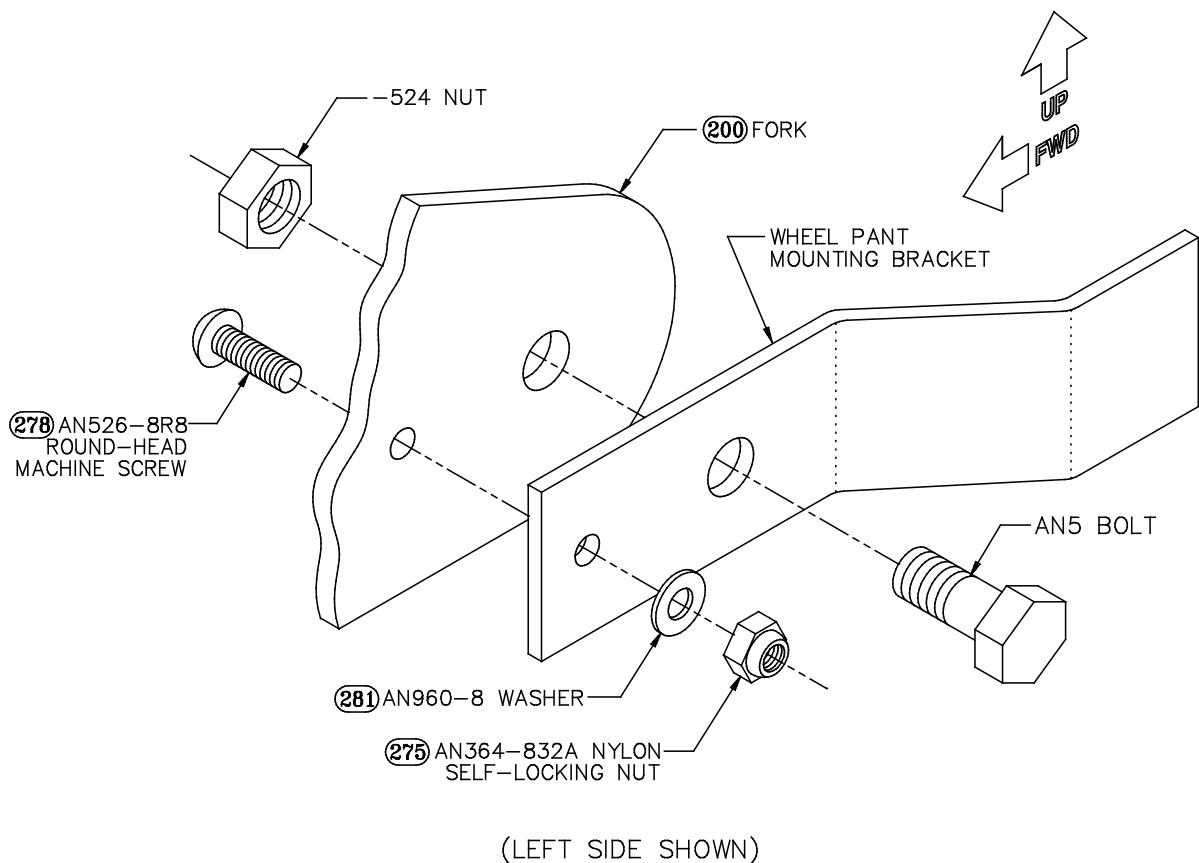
Screwing the Aft Wheel Pant Mounting Bracket to the Fork Arm
